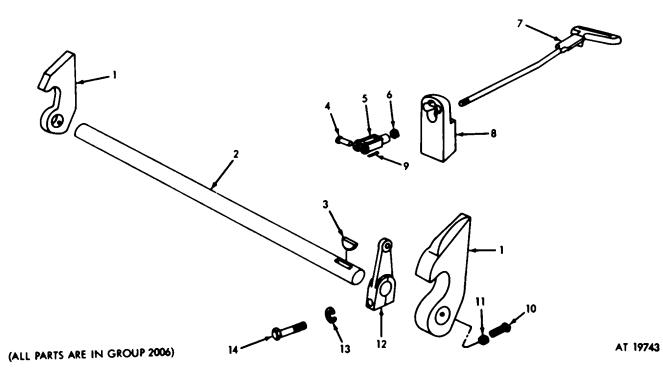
Moldboard carrying hooks and control handle-exploded view.
